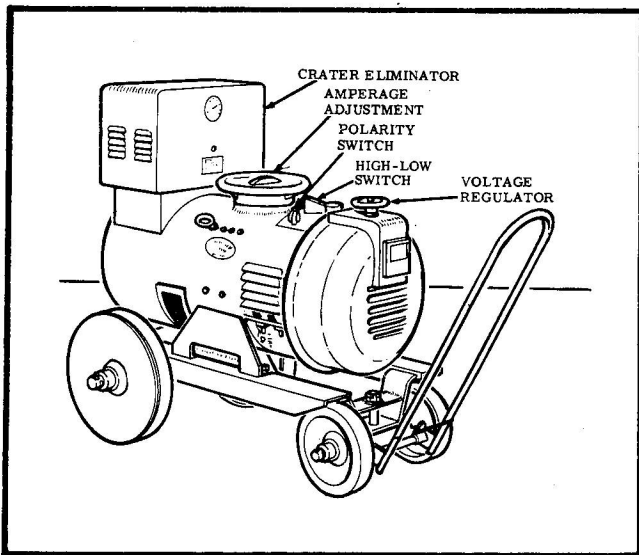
Arc Welding Generator with Crater Eliminator
